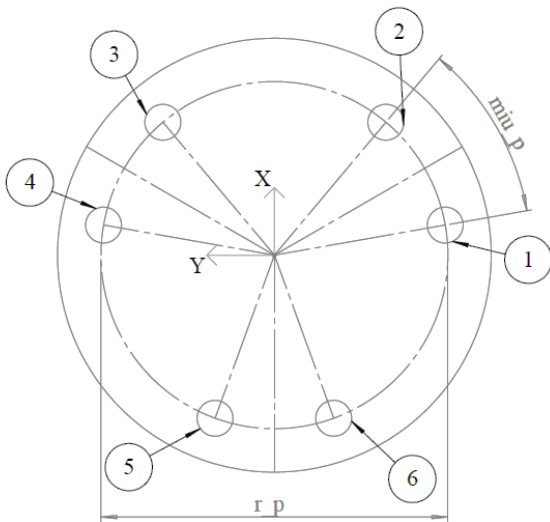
Illustration of actuator upper part attachment position on platform with r_p = platform radius and μ_p = pair of actuator upper part attachment spacing.
